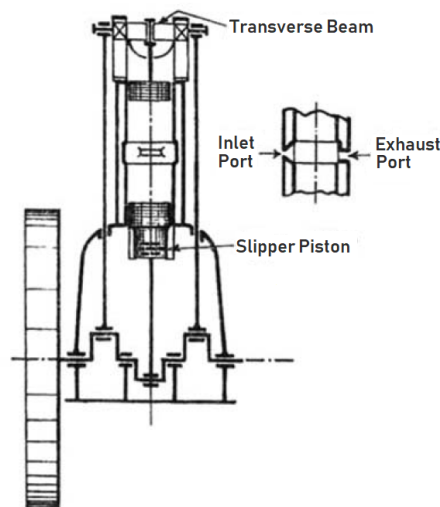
Wittig Gas Engine. Adapted from [9].
